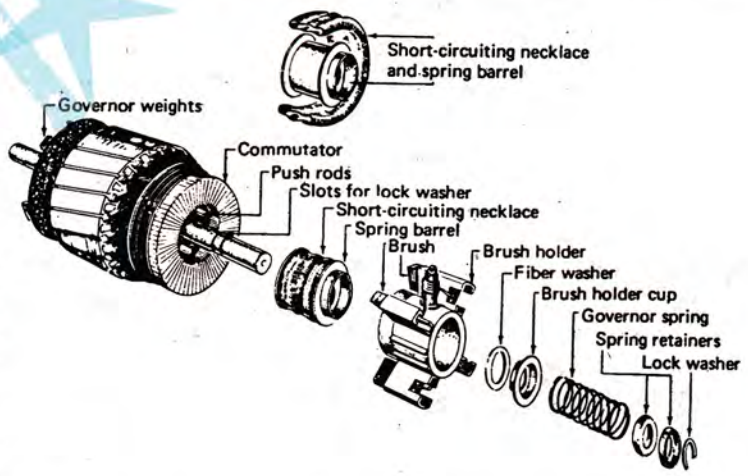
An exploded view of the rotor of a repulsion-start, induction-run motor, showing the short-circuiting and brush-lifting mechanism.
